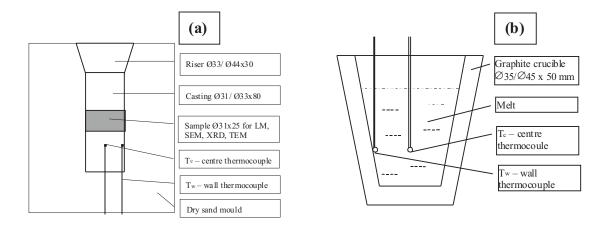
Schematic sketch of the system: (a) sand mould – casting with mounted thermocouples, (b) chamote-graphite crucible with thermocouples introduced from the top into a melt [4, 5, 9]
